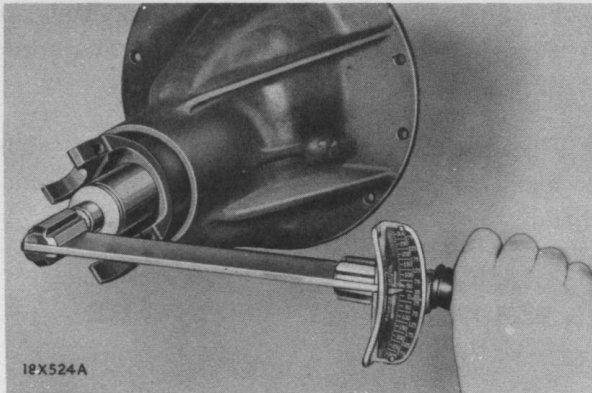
Checking Drive Pinion Bearing Pre-Load
